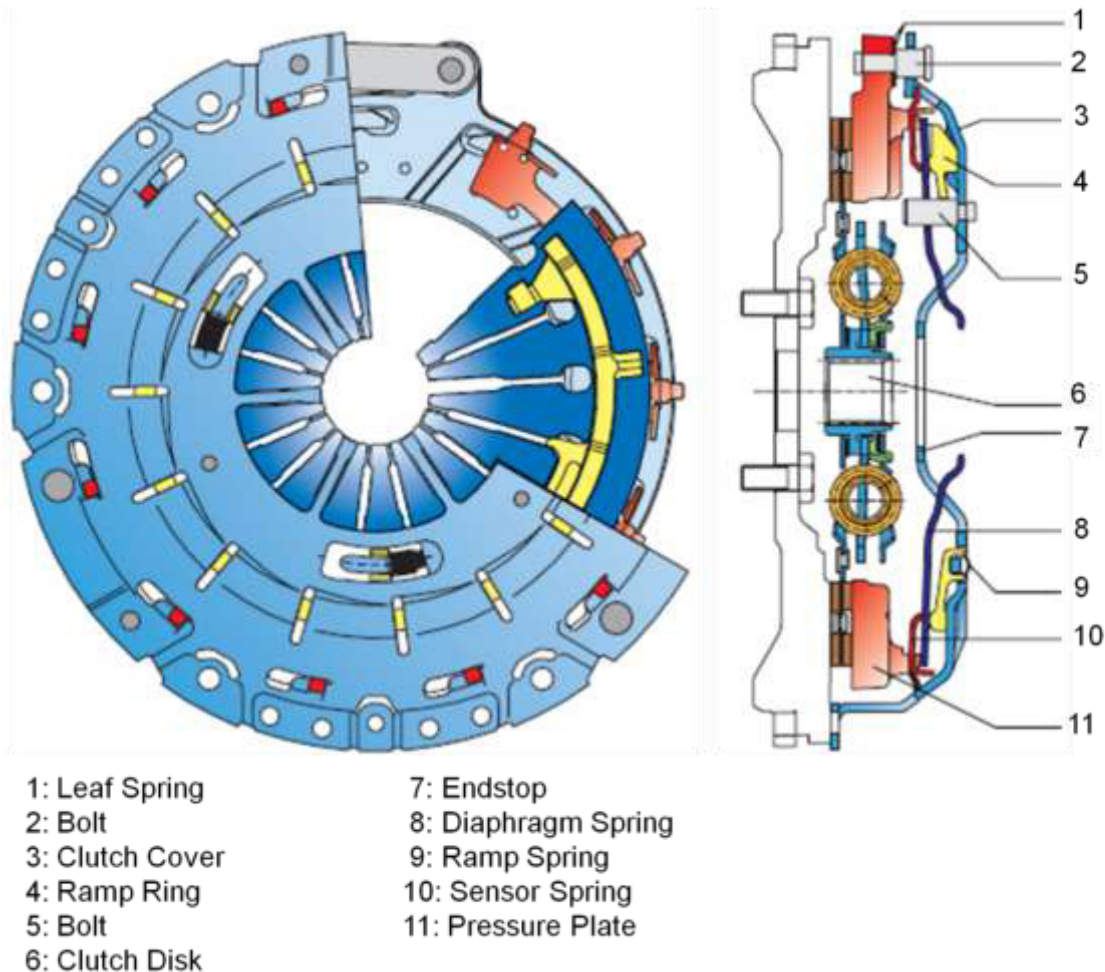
Structure of a Pressure Plate Assembly of a SAC System¹⁰
